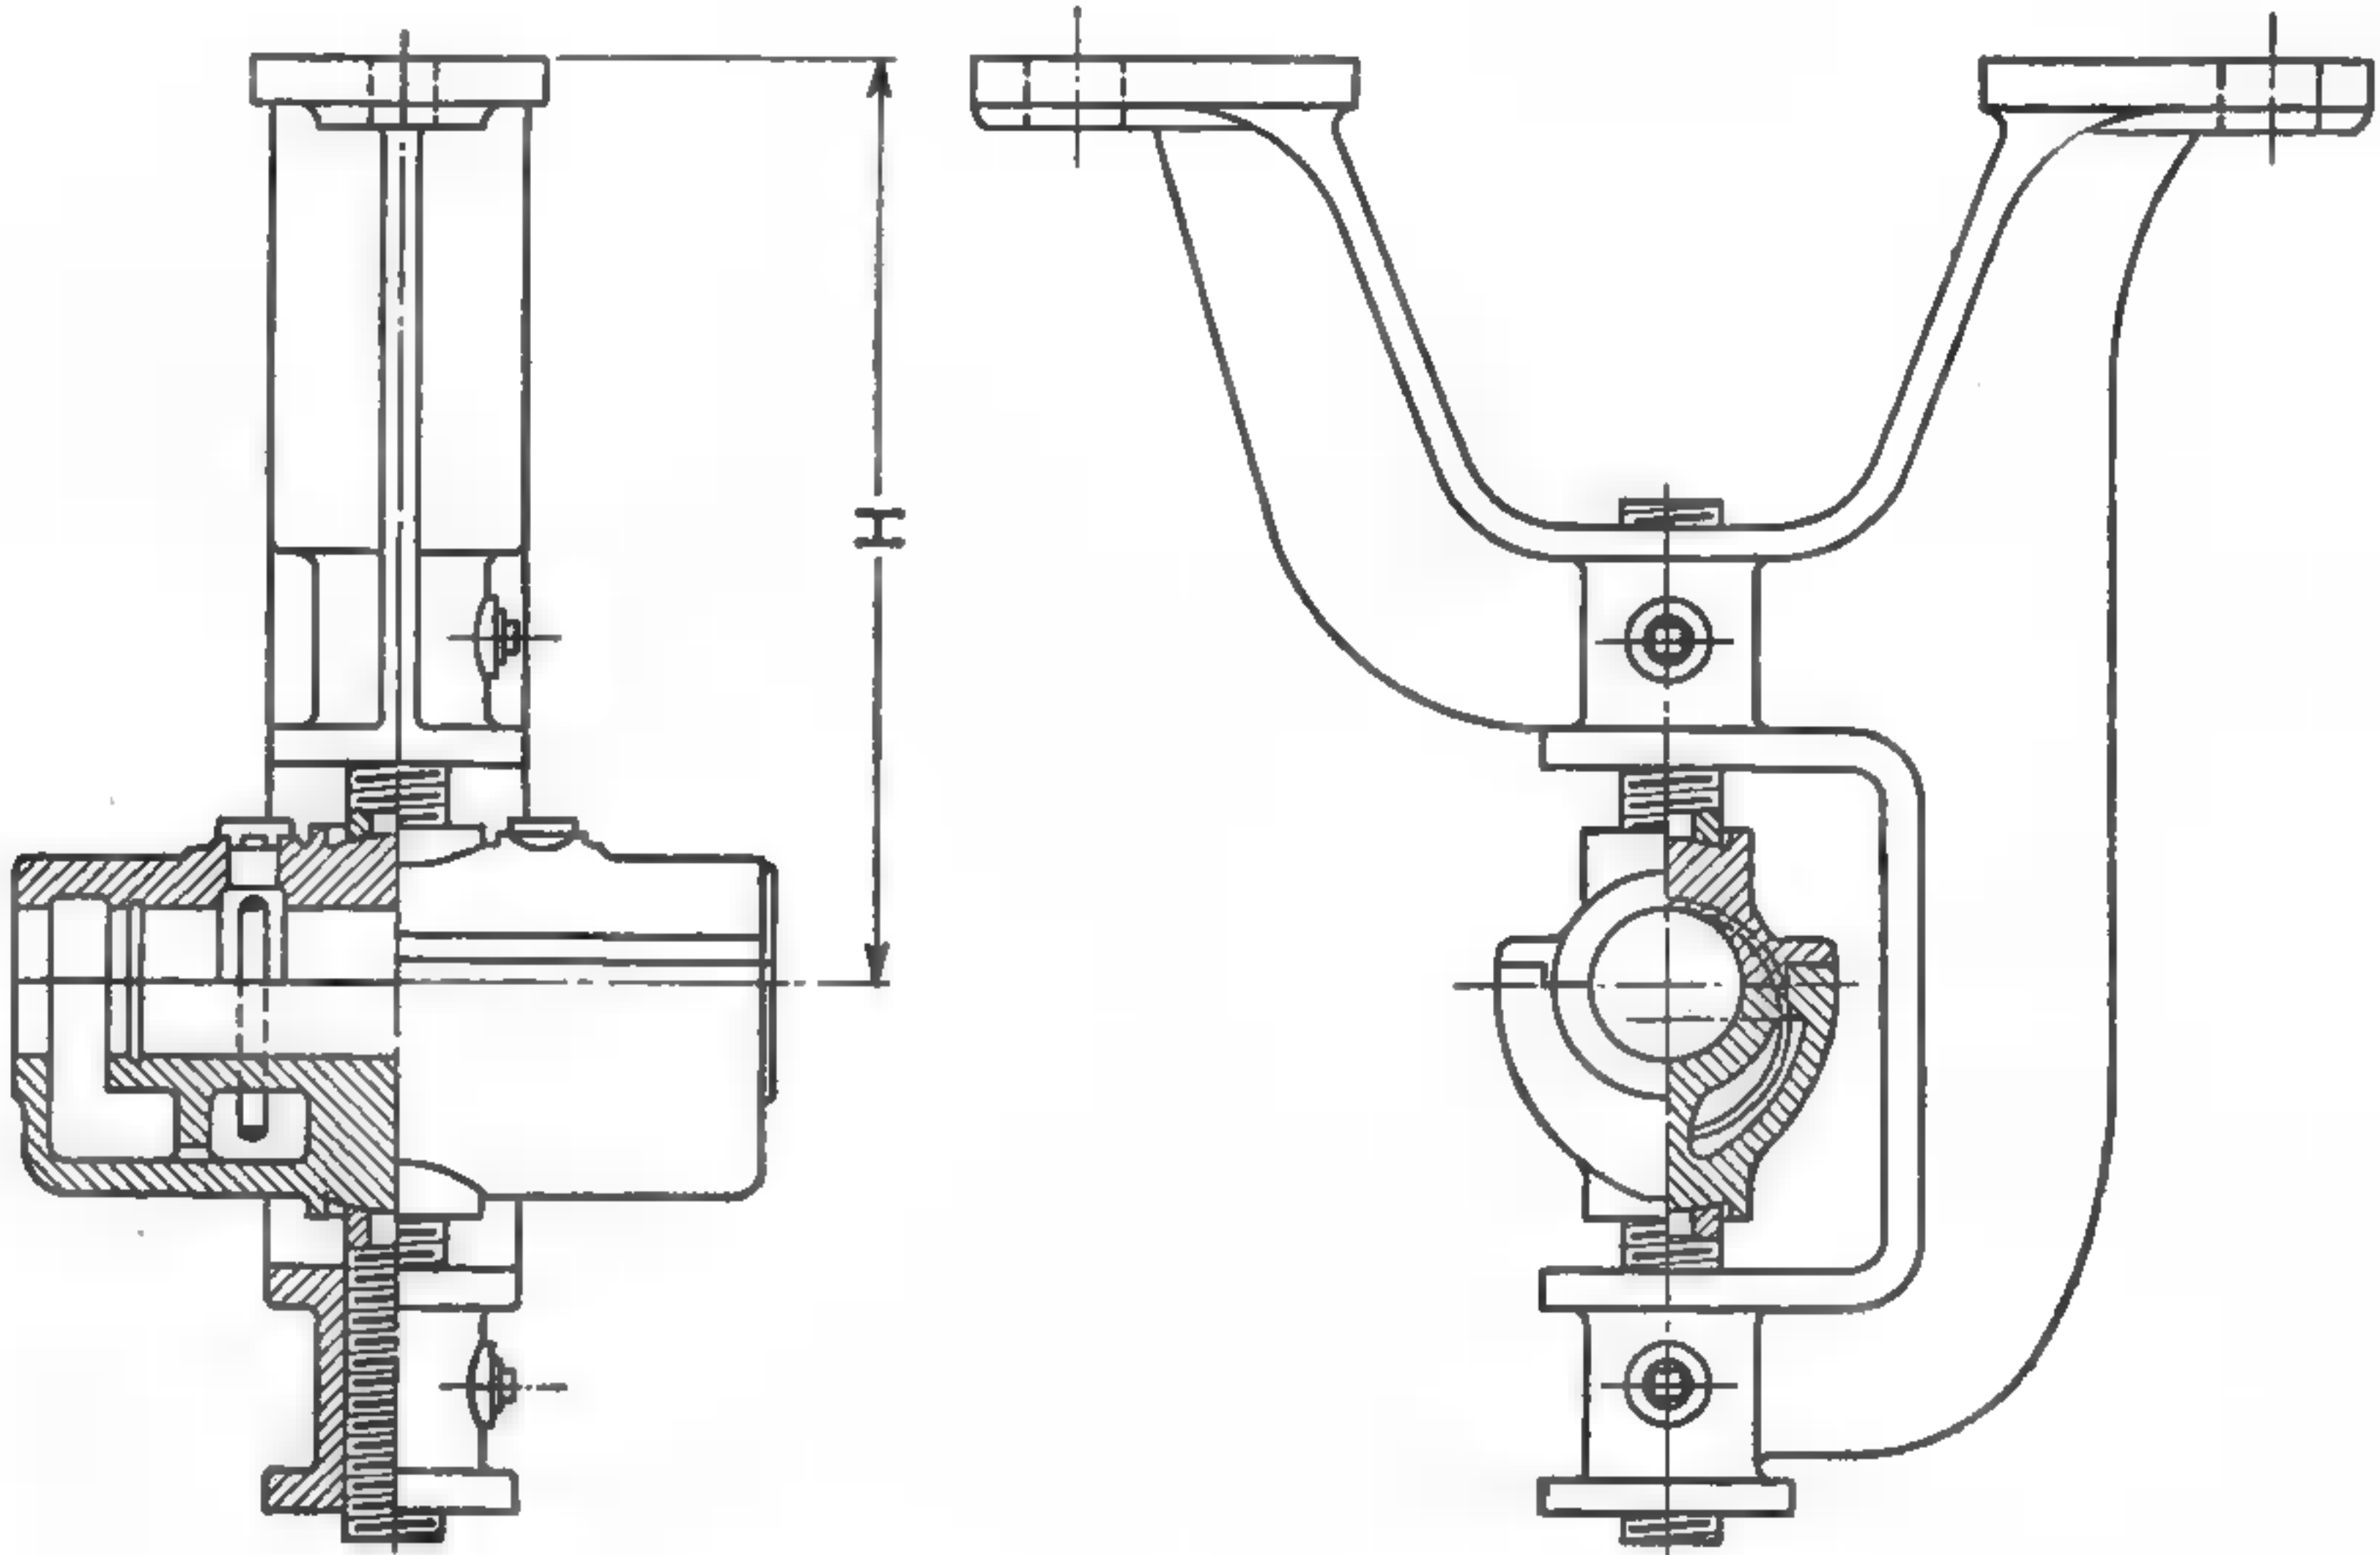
Sellers oil-ring bearing in a hanger.
